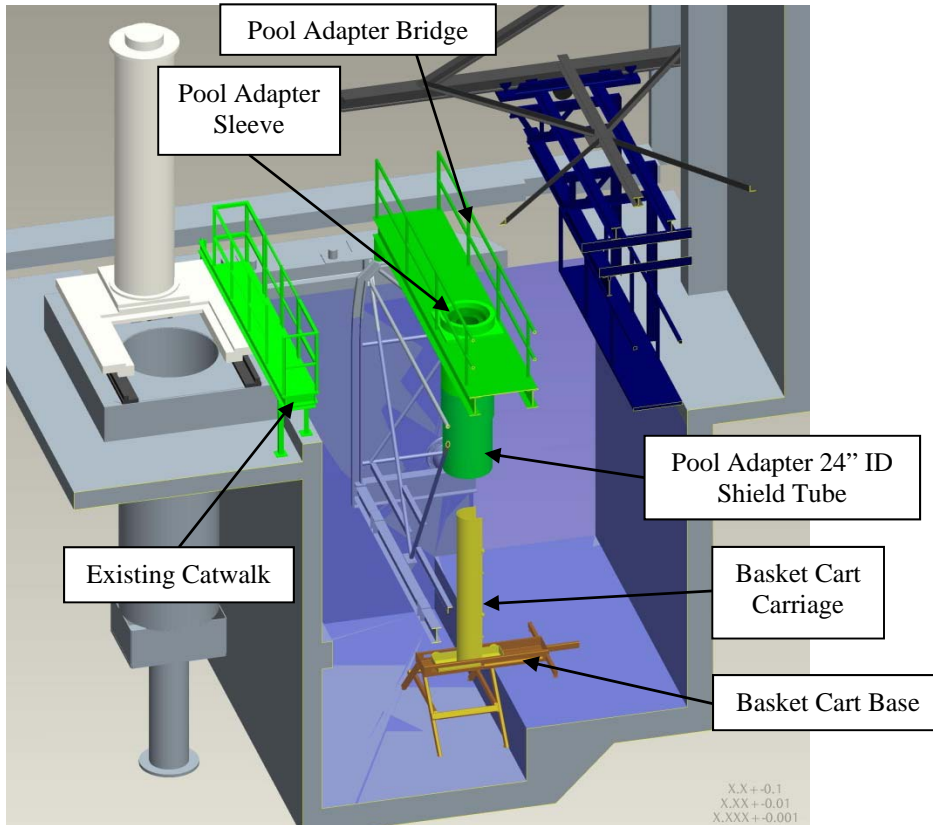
L-Basin Disassembly Area after Staging of Pool Adapter
